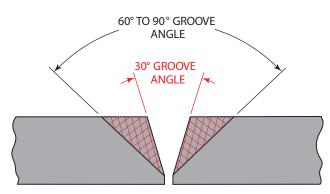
The narrower groove angle for FCAW saves on filler metal, welding time, and heat input into the part.
